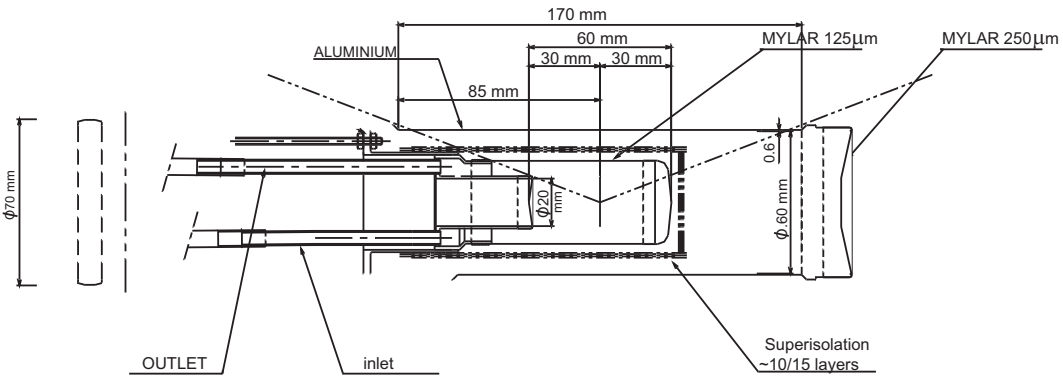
Technical drawing of the cryogenic target with a length of 60 mm.
